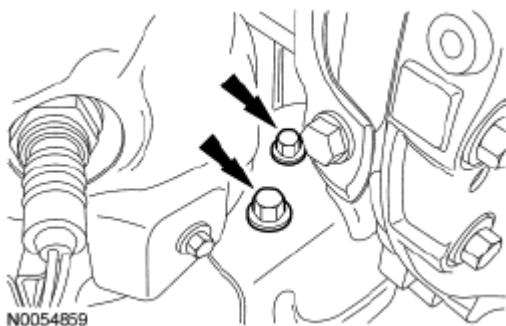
Locating LH Catalytic Converter Bracket Bolts
